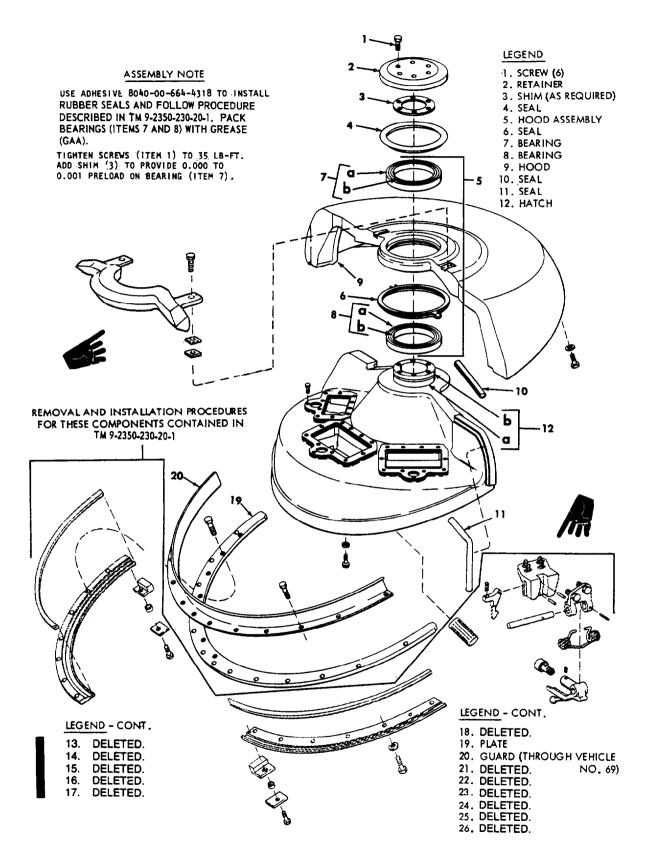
Disassembly/assembly-driver's hood and rotatable hatch and repair data.
